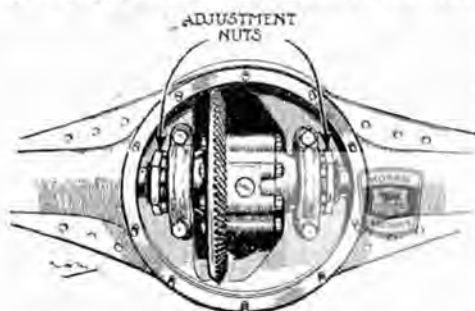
Bevel wheel adjustment is effected by two large nuts, which may be reached after the cover plate has been removed.
